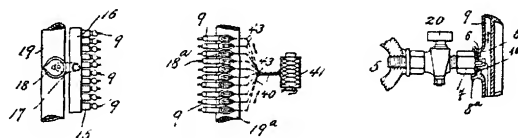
The Denis Machine for Producing Threads from Collodion.
